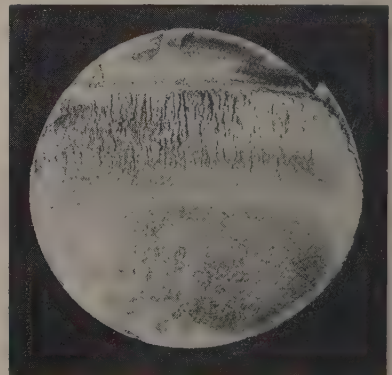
End view of fracture shown in Fig. 1. Crack started at fillet, progressed through shaft
